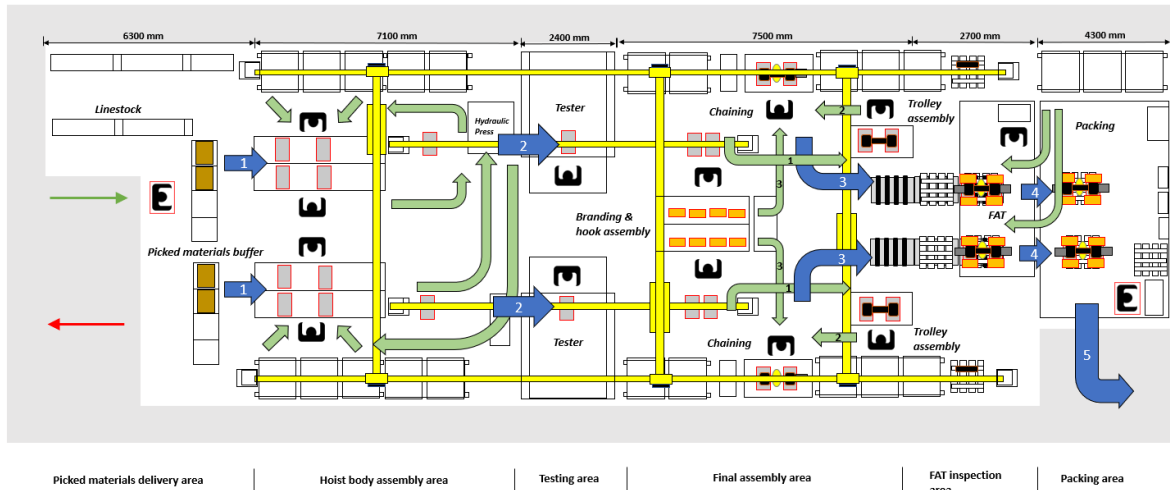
Blank paper scenario #2 assembly area layout (Special hoists)
